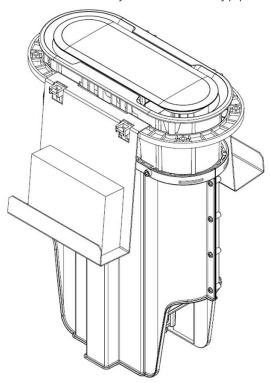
ACCESSORY BOX IN HPX-AC-MB
